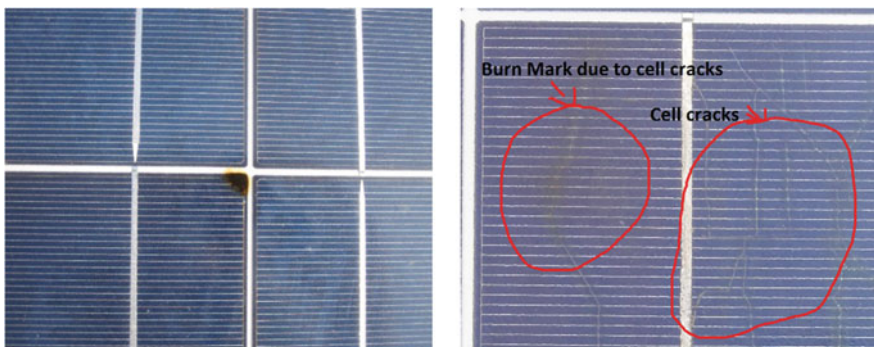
Hot spot due to bypass diode failure (*left*), hot spot due to cell cracks (*right*)
